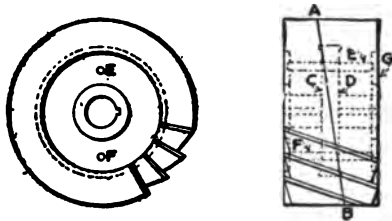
ADJUSTABLE SLOT MILLING CUTTER
